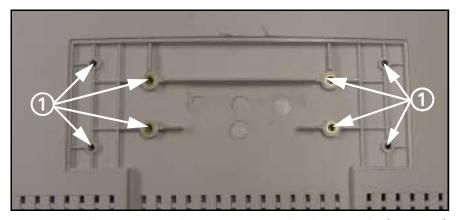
Flat Screen Display Mounting Bracket Screw Holes(rear view)
